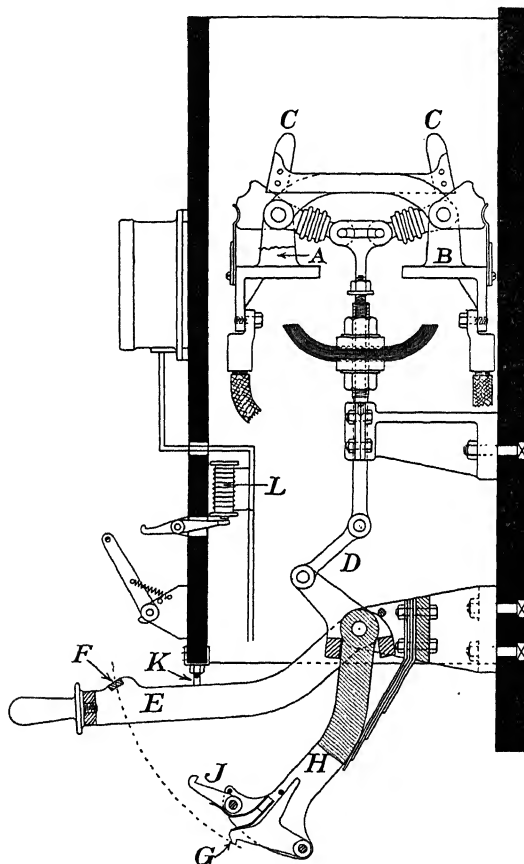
500 K. W. carbon-tipped horn break circuit-breaker open.
